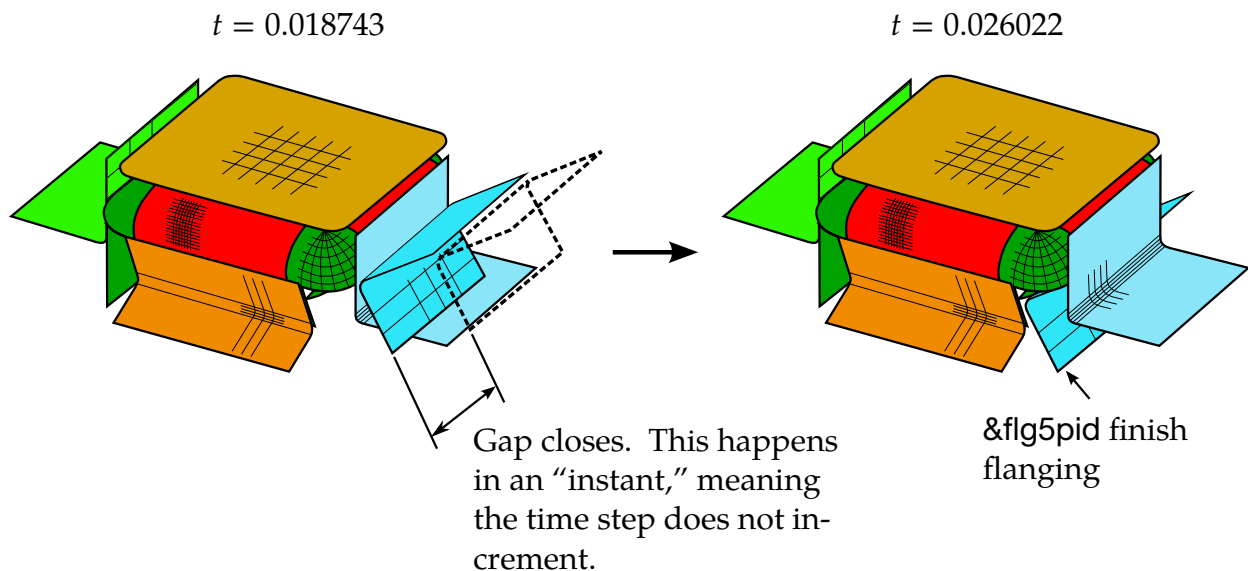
Closing the empty travel (left); flanging steel &flg5pid completes flanging process (right).
